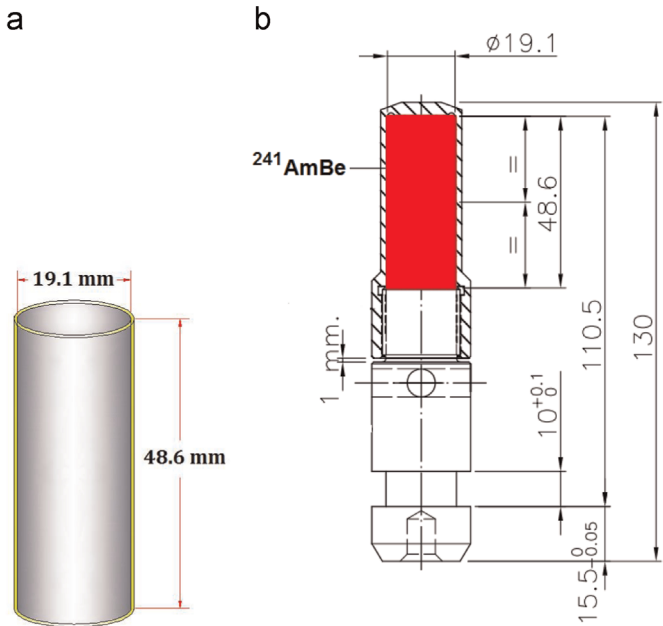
$^{241}\text{AmBe}$ source double capsule (a) and capsule holder (b), dimensions are in mm.
